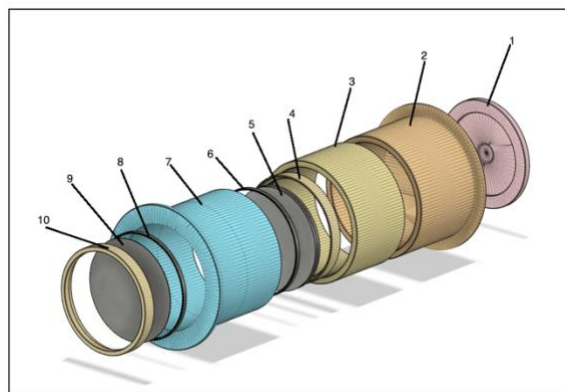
CAD drawing, exploded view of test apparatus inserted into Helmholtz coil.
